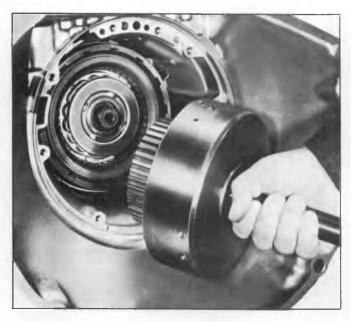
T--Removing Forward Clutch Assembly and Turbine Shaft
